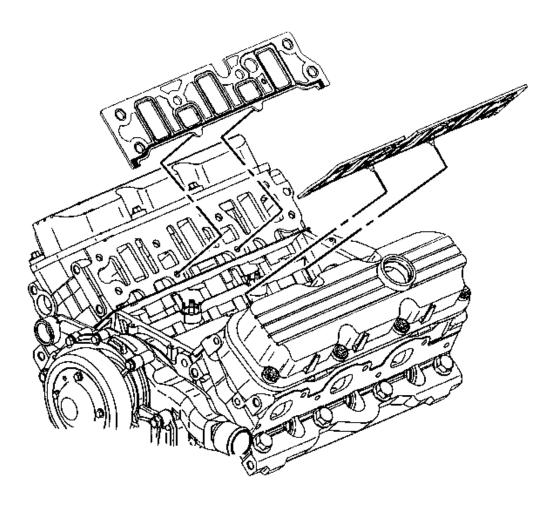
Lower Intake Manifold Gaskets Courtesy of GENERAL MOTORS CORP.
